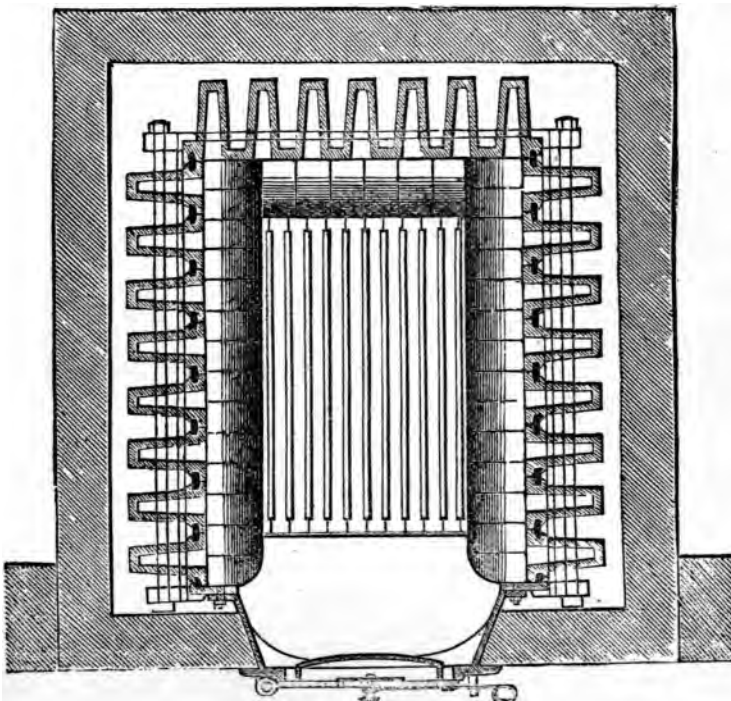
CROSS SECTION. CONVOLUTED STOVE.
